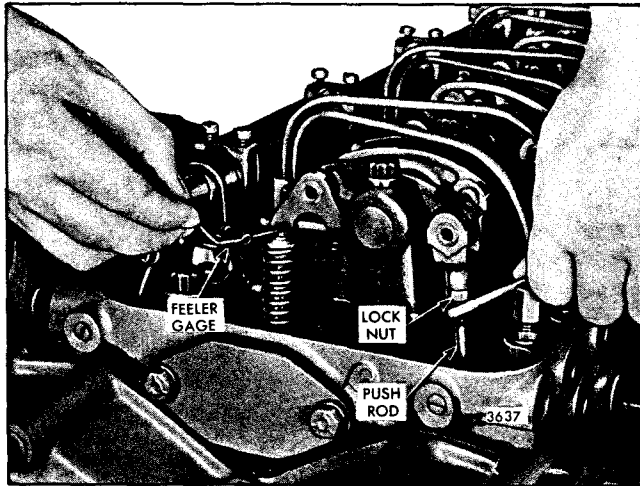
Adjusting Valve Clearance (Four-Valve Cylinder Head)
